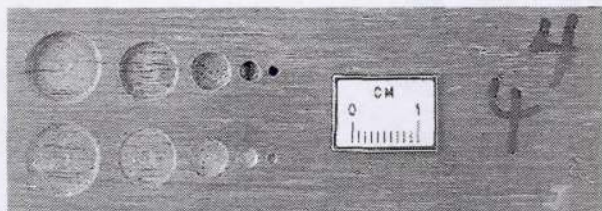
Photograph of SiC/CAS CMC sample showing flat bottom holes.
